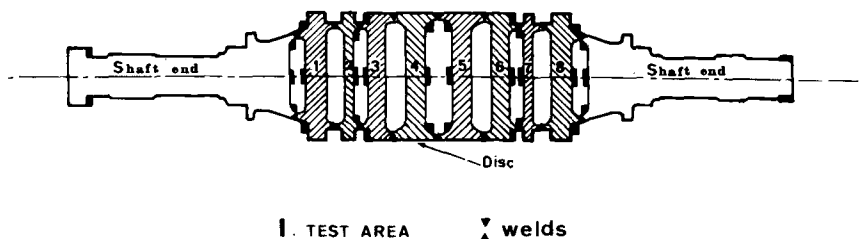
Section through a welded polyblock turbine rotor.
